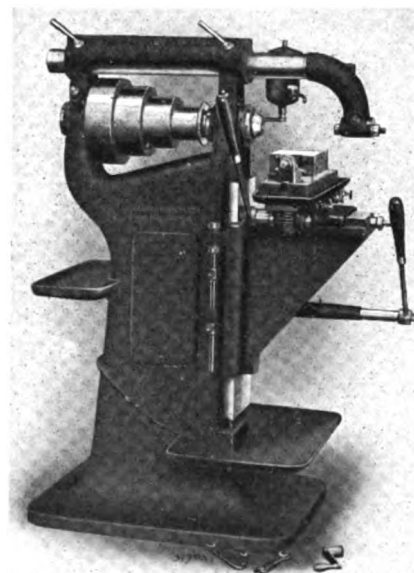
No. 10 Hand Milling Machine with Overhanging Arm
